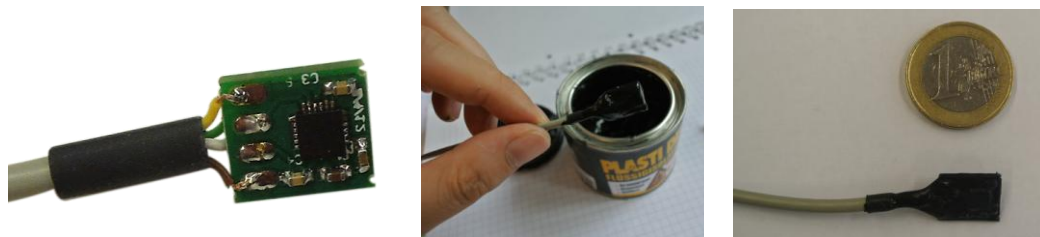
Photo of the sensor board (dimensions: 14mm × 11mm × 2mm).
